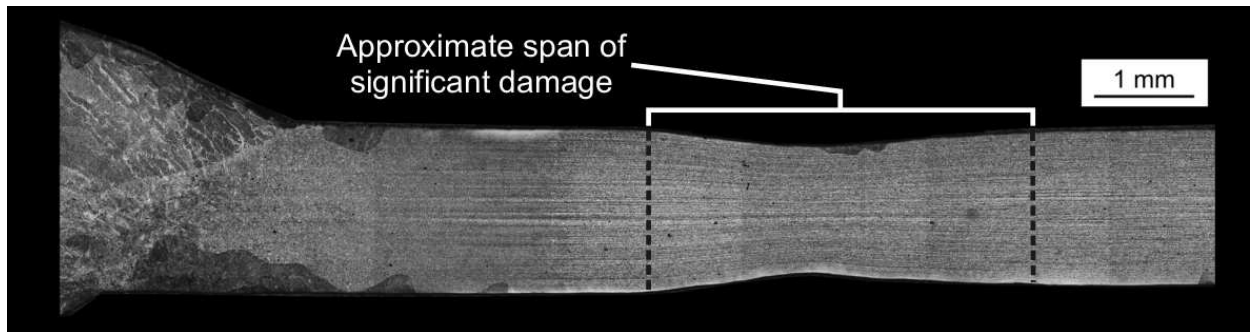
Longitudinal section from a partial fracture test of a TB88 welded sample that necked in the HAZ failure location.
